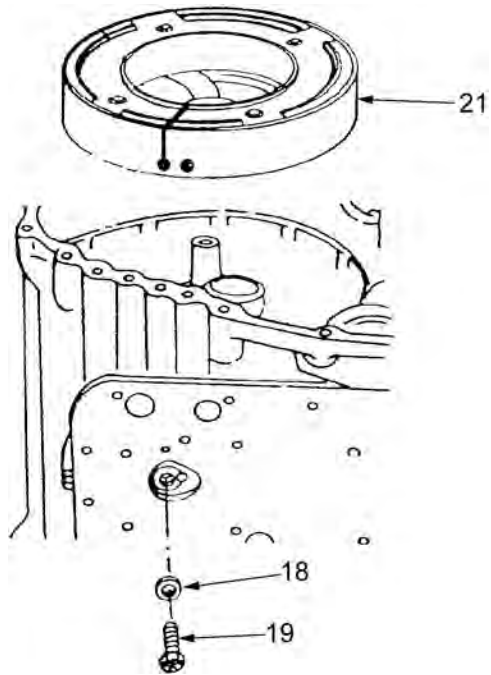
Third Clutch Piston Housing Assembly Hardware Installation.
